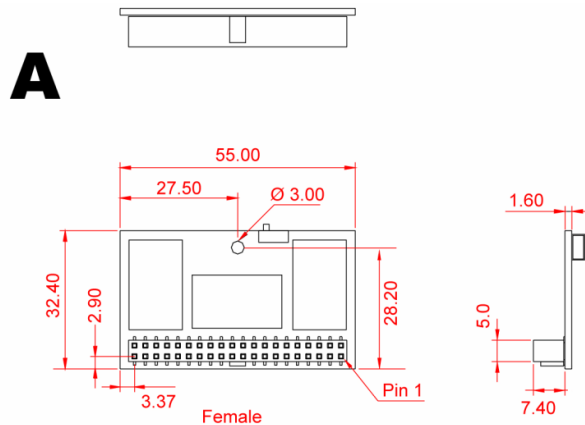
Mechanical Dimension of EDC4000 40-pin(Horizontal Female Type B)
